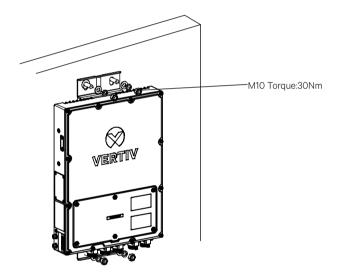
Installing the Rectifier to the Wall (Flat)
